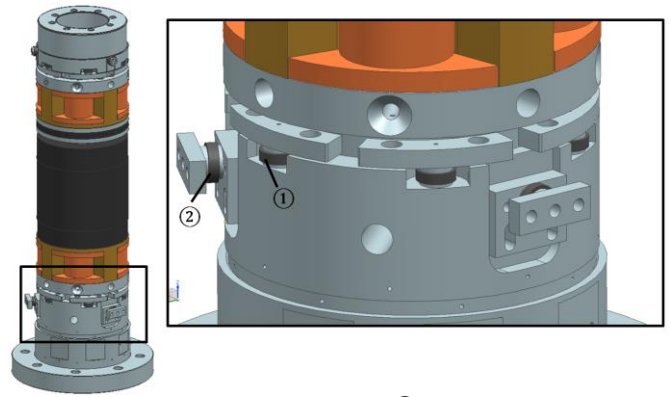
Detail view of the lower BB plain. ①: Radial rolling element bearing; ②: Axial rolling element bearing
